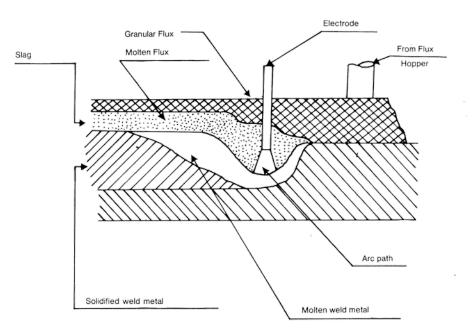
SUBMERGED ARC WELDING PROCESS
